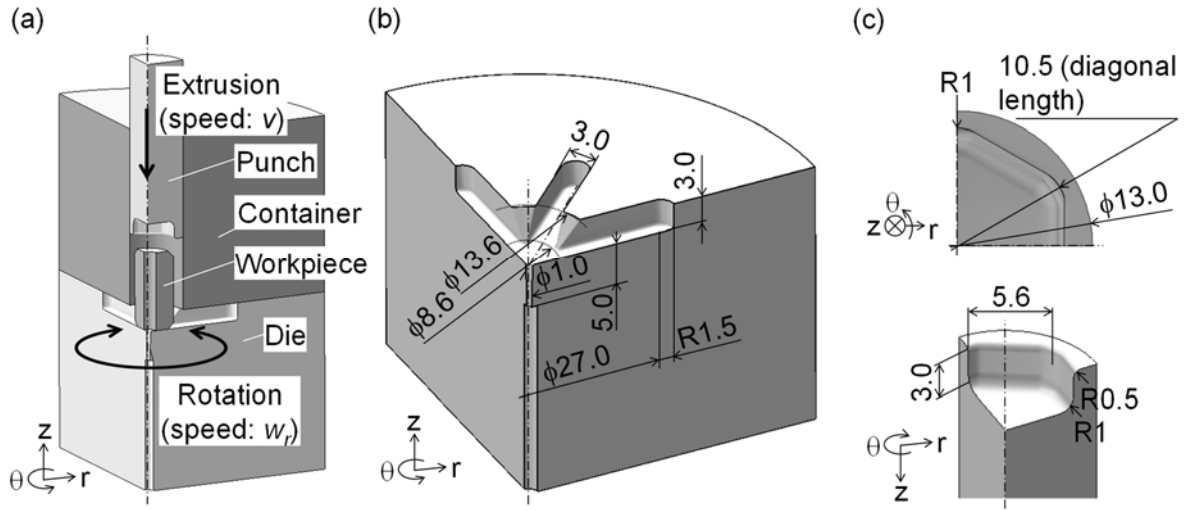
(a) die arrangement, (b) shape of tooth part of die and (c) end shape of punch for lateral extrusion with gear shape.
